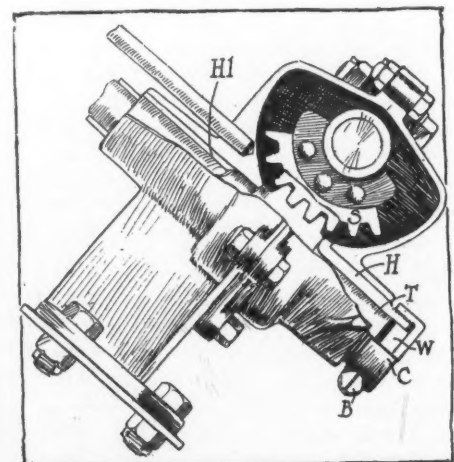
CONSTRUCTION OF ANOTHER TYPE OF STEERING GEAR
